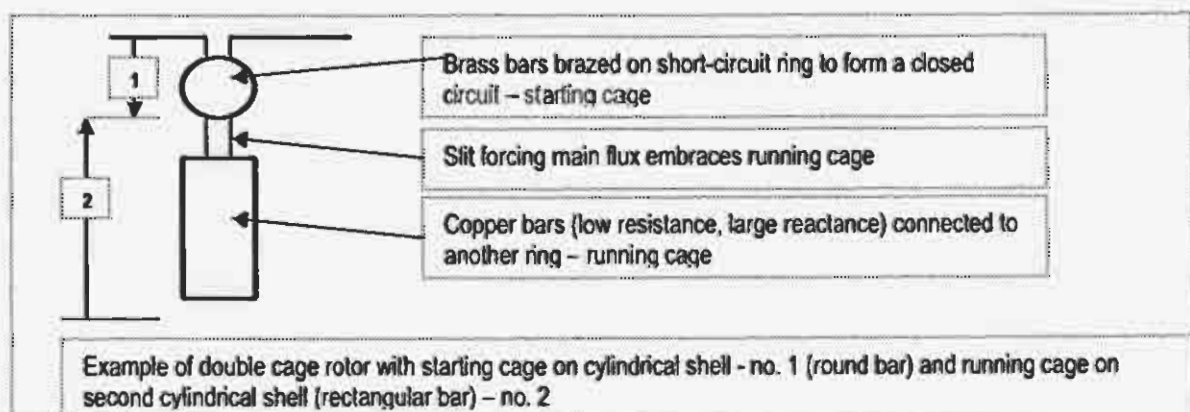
Partial cross-section of a double cage fabricated rotor
